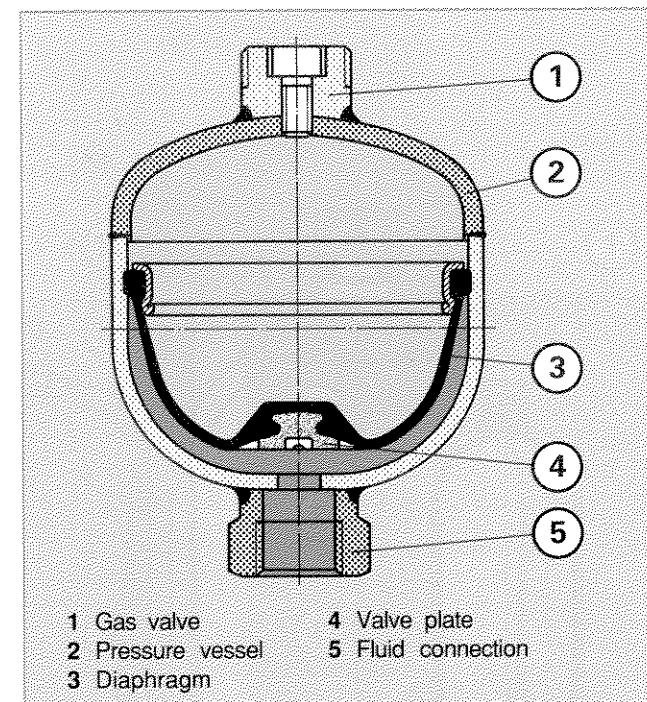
Diaphragm-type accumulator, welded version
